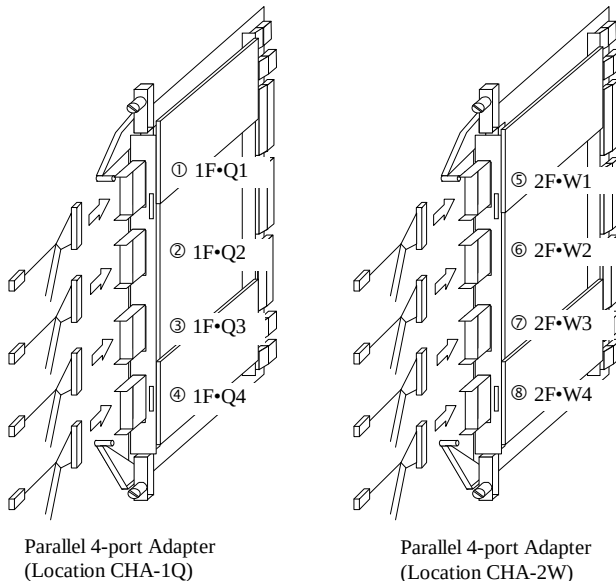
Connection of CH Cables (Add.1)
